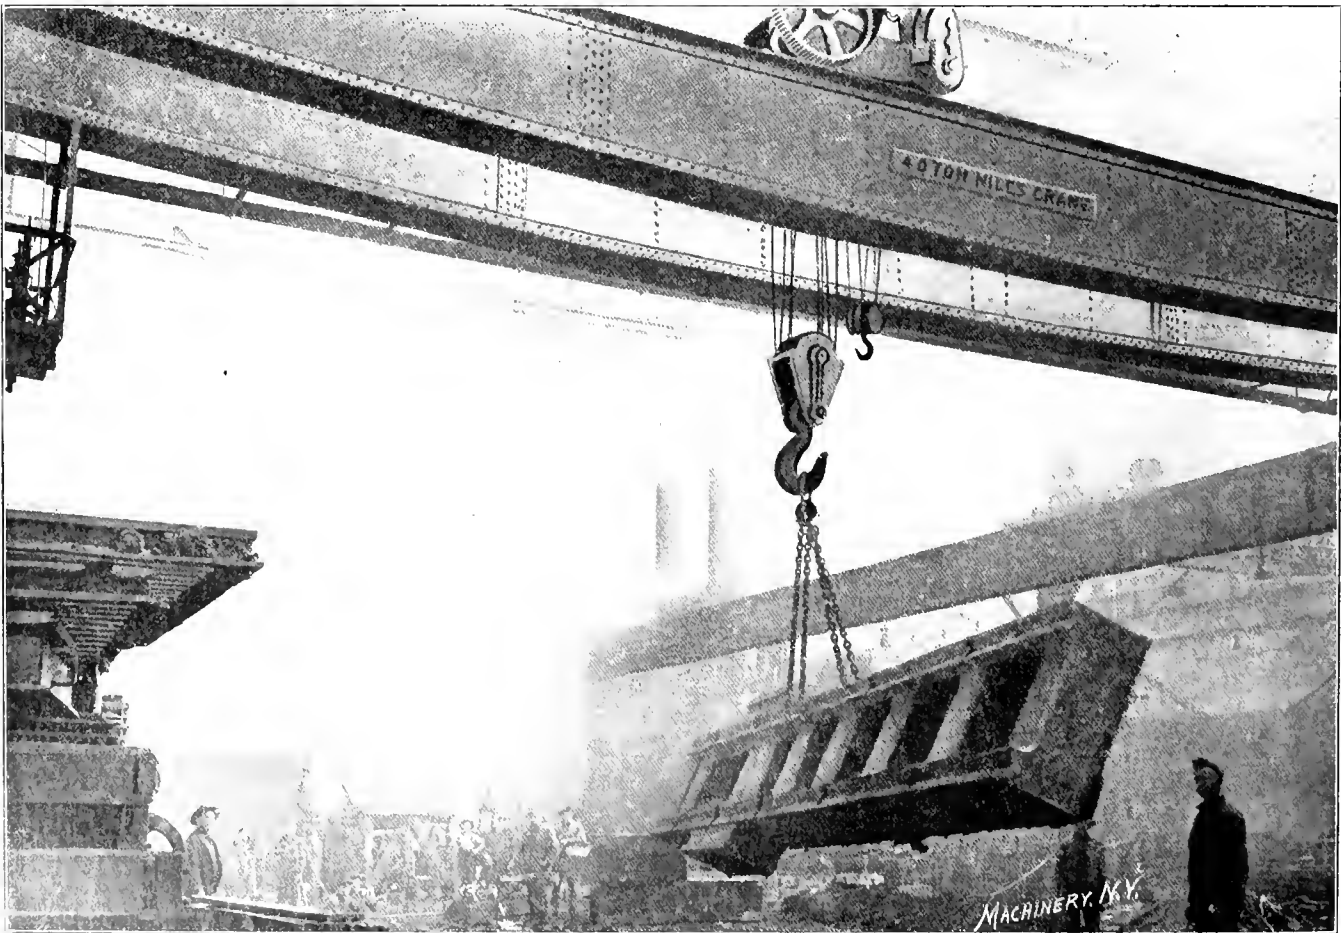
Main Floor of Foundry, served by two Cranes of seventy-five foot Span.
